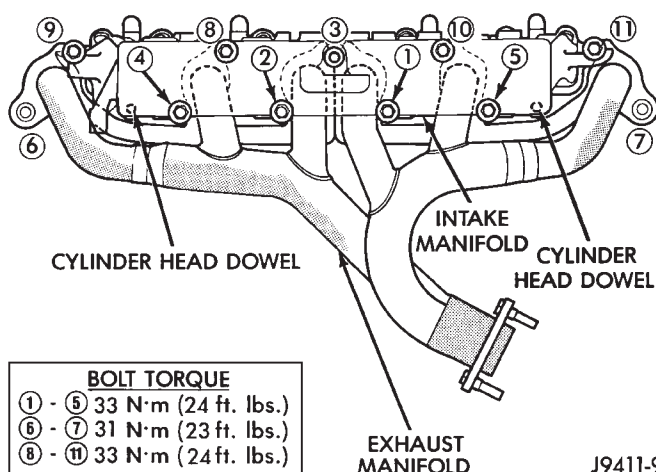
Intake/Engine Exhaust Manifold Installation (4.0L Engine)
